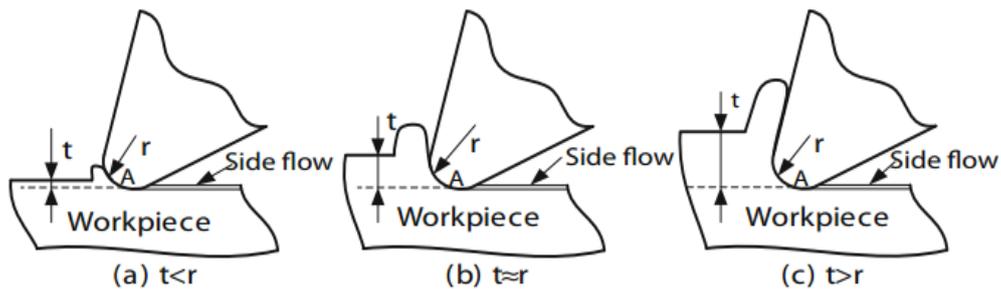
(b): Chip formation due to cutting edge radius in the micro cutting process [22].
